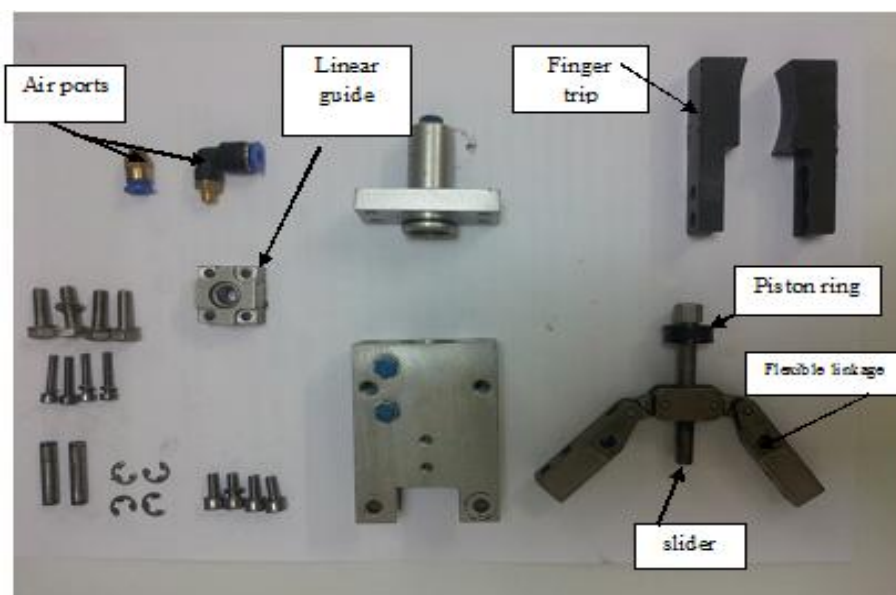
The Detailed Sketch of the Parts of Gripper. Specifications of the Gripper: Piston Diameter (15mm), Piston Rod Diameter (5mm), Length of Stroke (20mm) Material: Carbon Steel
